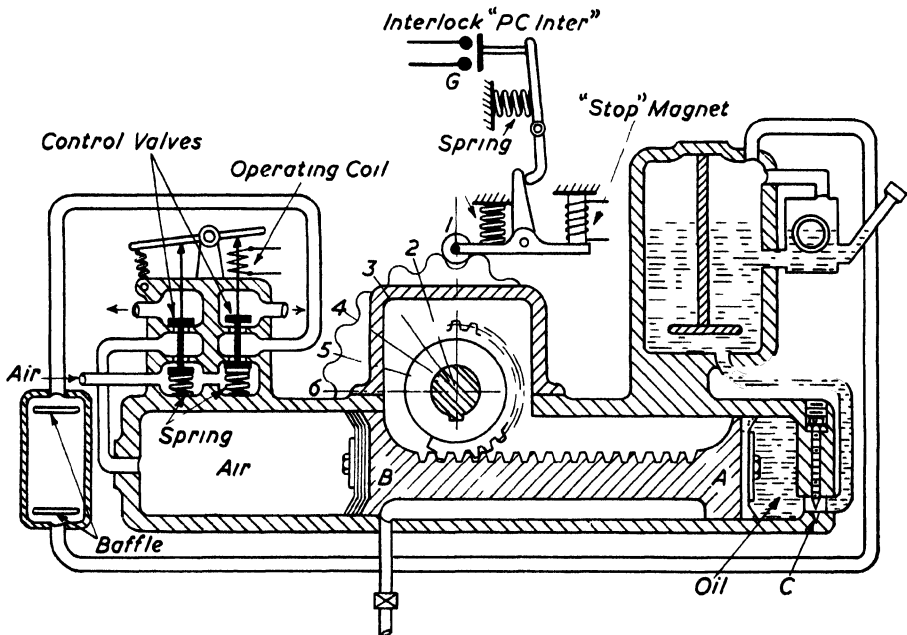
OPERATING MECHANISM OF B.T.-H. TYPE PCM CAM-SHAFT CONTACTOR GROUP
